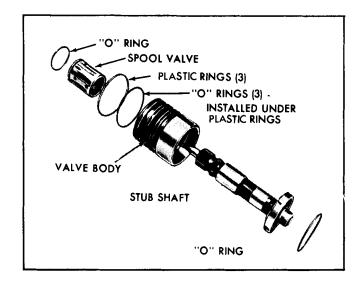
Exploded View of Valve Body and Shaft Assembly
